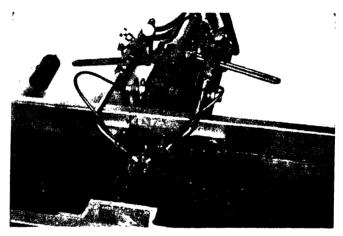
A flame hardening machine (Courtesy of: Linde Air Products Company)
